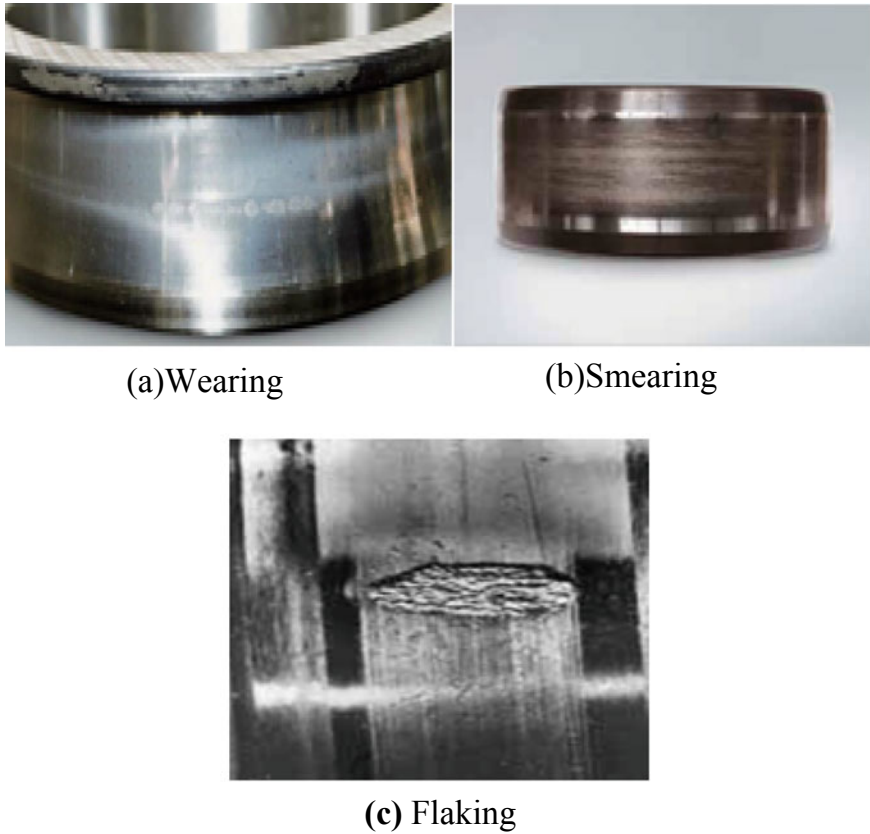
Typical photograph of (NBC: 30205) defects in bearing [8]
